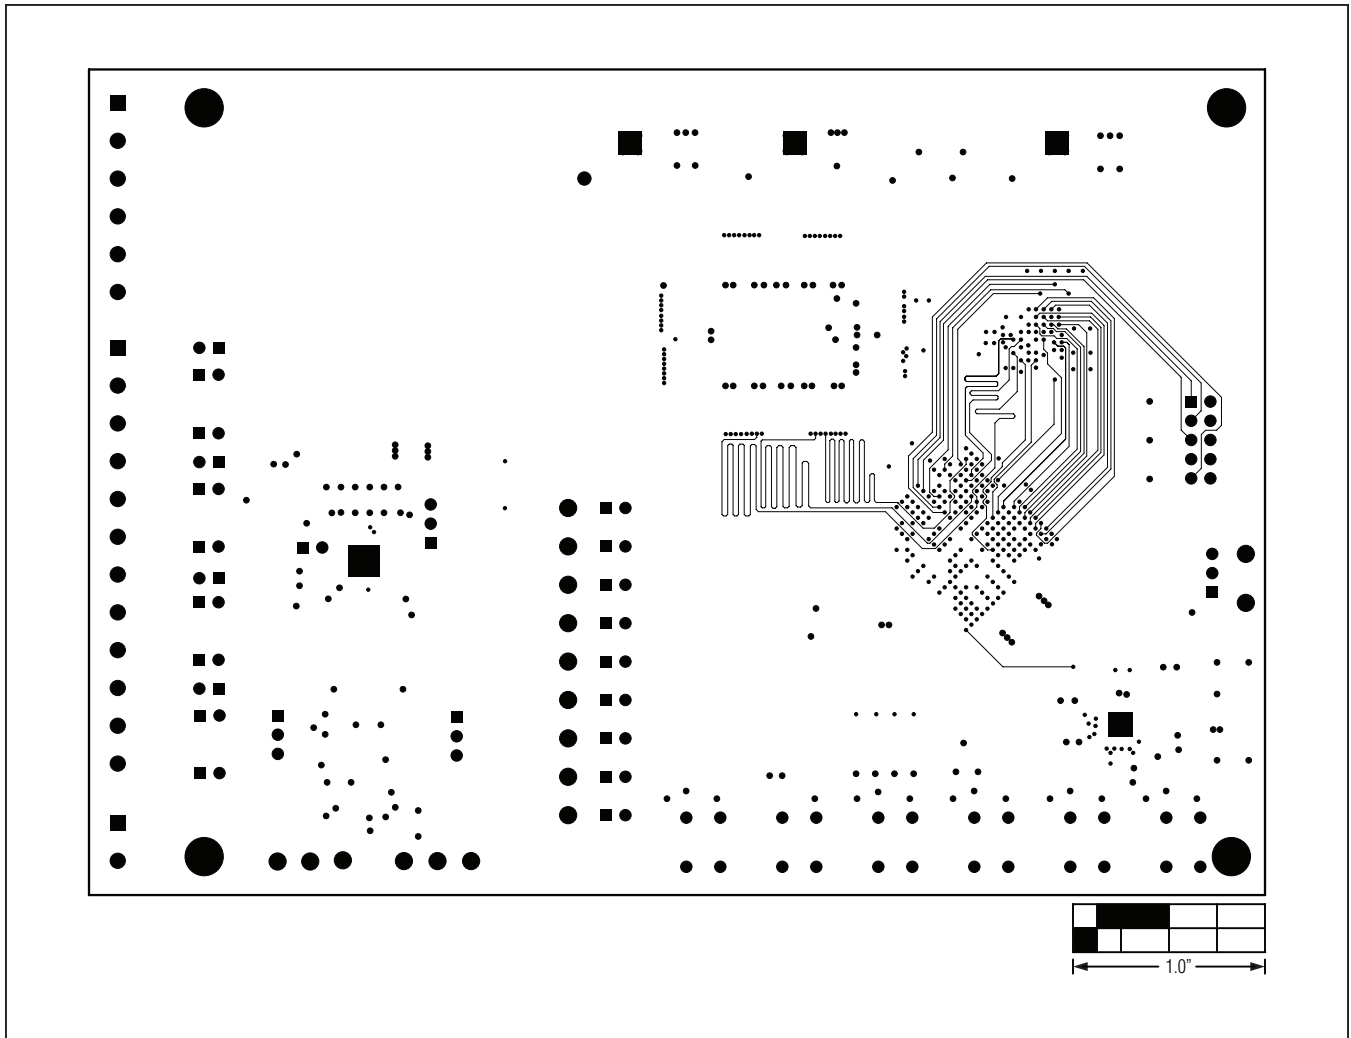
MAX11043 EV Kit PCB Layout—Ground Layer 7
